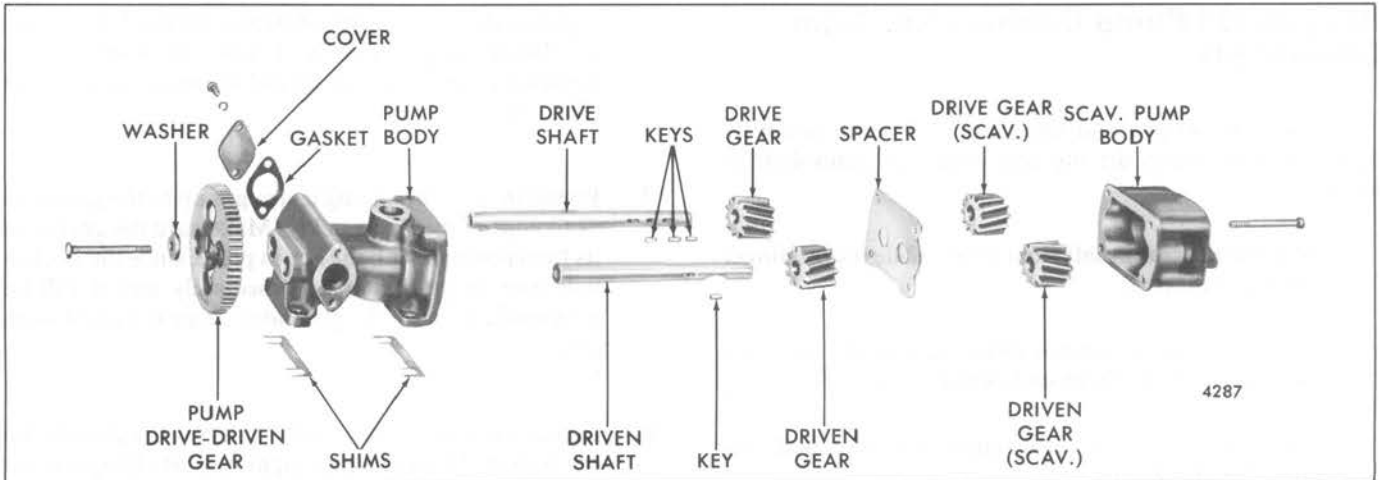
Lubricating Oil Pump Details and Relative Location of Parts (6V-92 and 8V-92 Engine)
